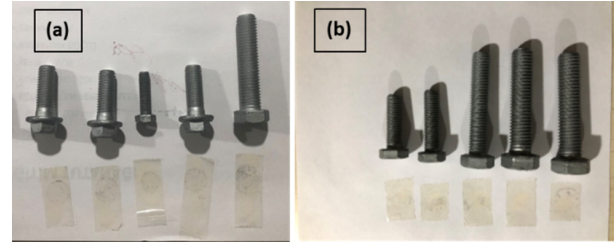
Adhesion test results (a) 2-layer coated bolt (b) 3-layer coated bolt.
